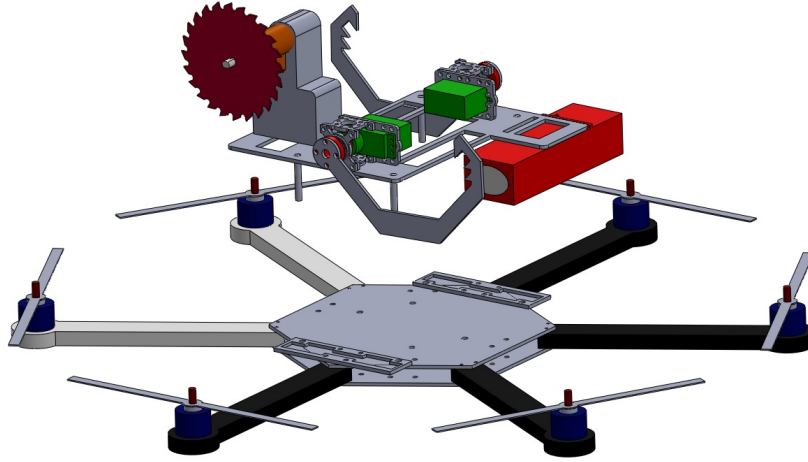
Mounting the pruning mechanism on an hexarotor helicopter.
